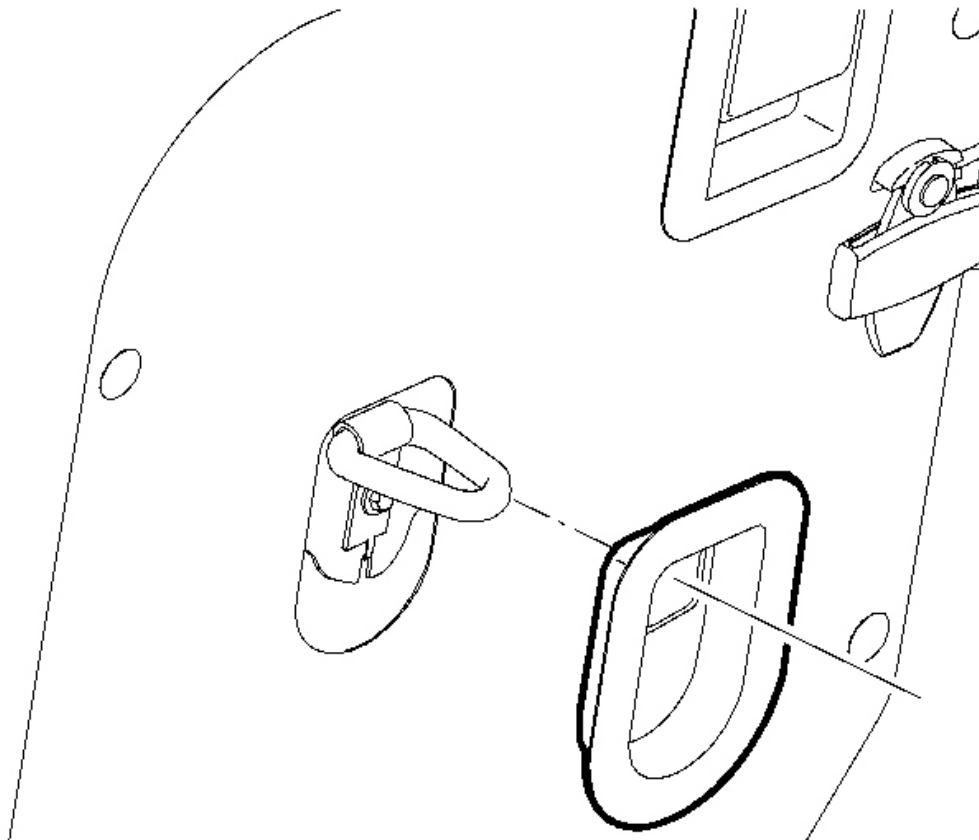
Removing/Installing Child Tether Anchor Escutcheon
